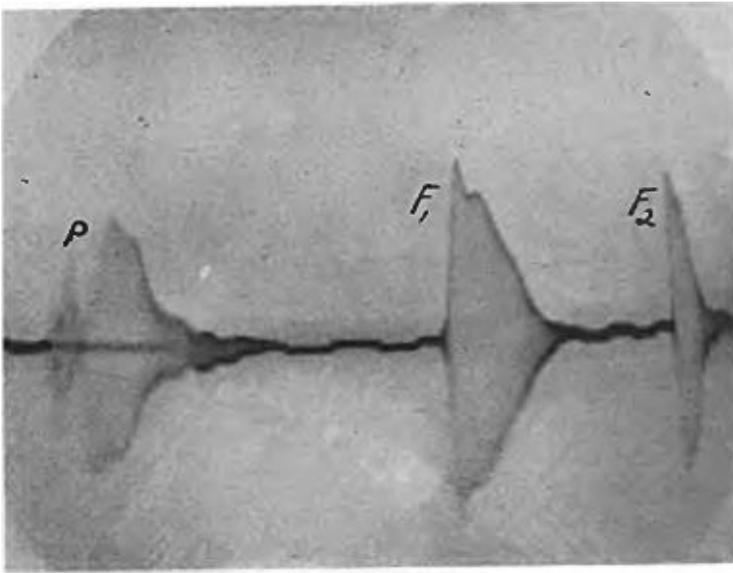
Same as Fig. 20 but at a place where the weld is completely unfused. F_1 is the first reflection from the weld and F_2 the second.
